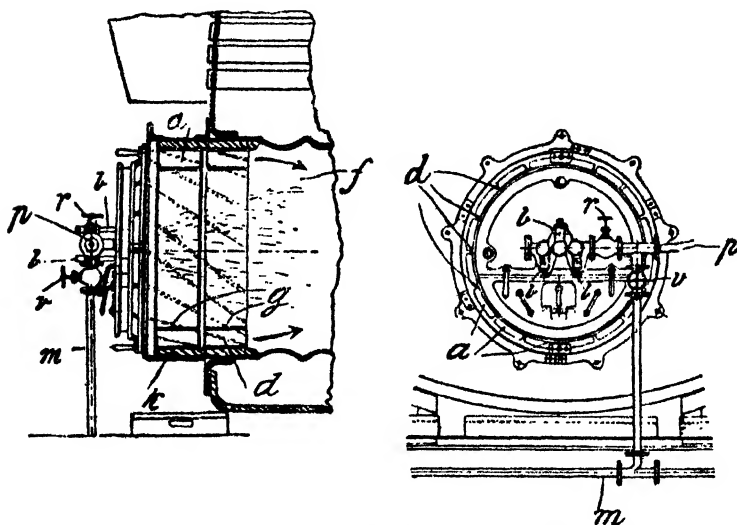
Arrangement of Meijer furnace with triple-jet pressure burner
